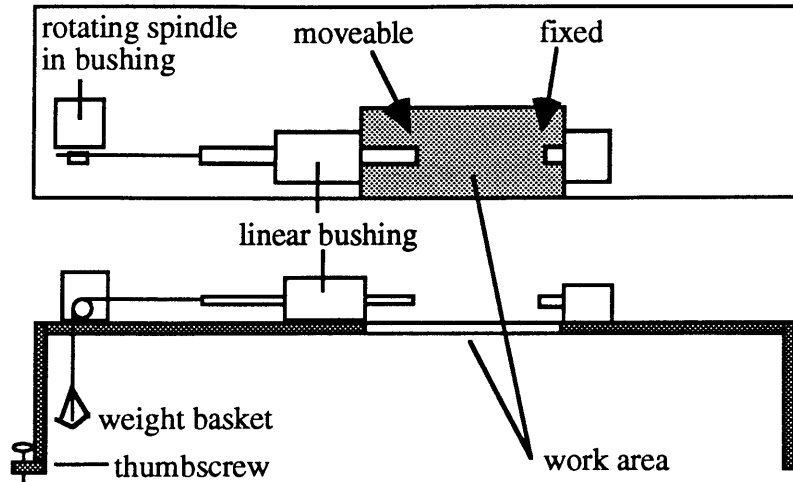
Top and side views of basic platform. Fixed rod is on right, moveable on left. Fixtures are attached to rod ends. Resting position of sliding rod is determined by thumbscrew height adjustment..
